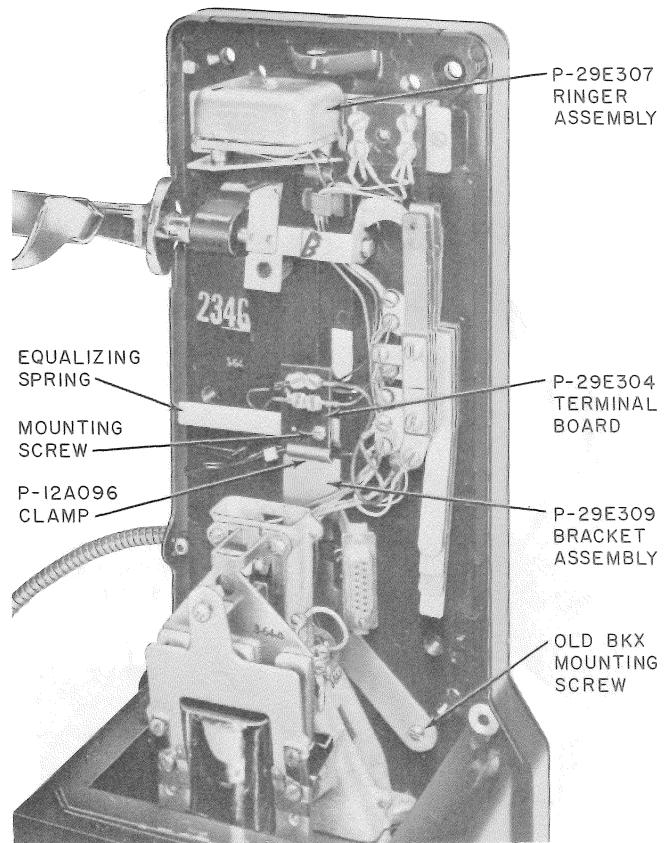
Backplate Assembly With D-180120 Kit of Parts Installed
